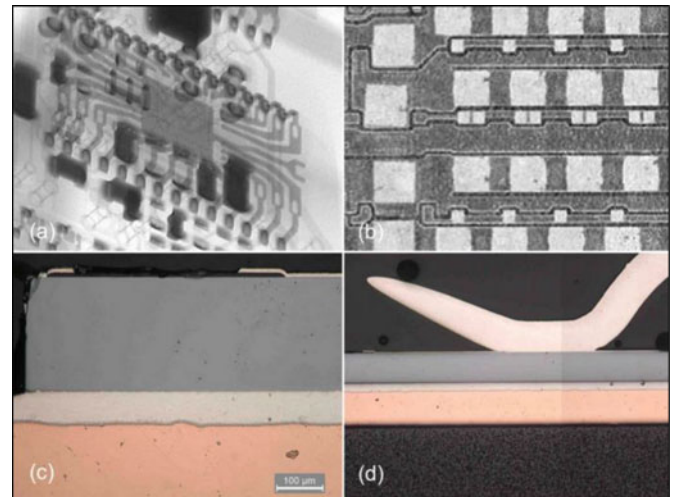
(a) X-ray inspection of driver-board solder-joints, (b) graphical representation (excerpt) of scanning-acoustic-microscopy signal from die-attach solder of IGBT and diode chips, (c) cross-sectional inspection of die-attach solder, and (d) bond-wire attachment to chip.
